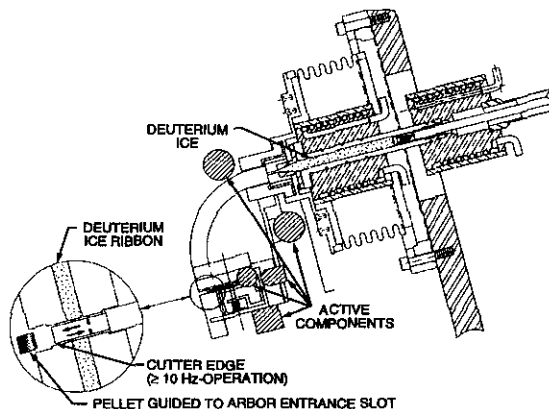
Close-up view of extruder feed and pellet punch components (punching of pellets is illustrated).
